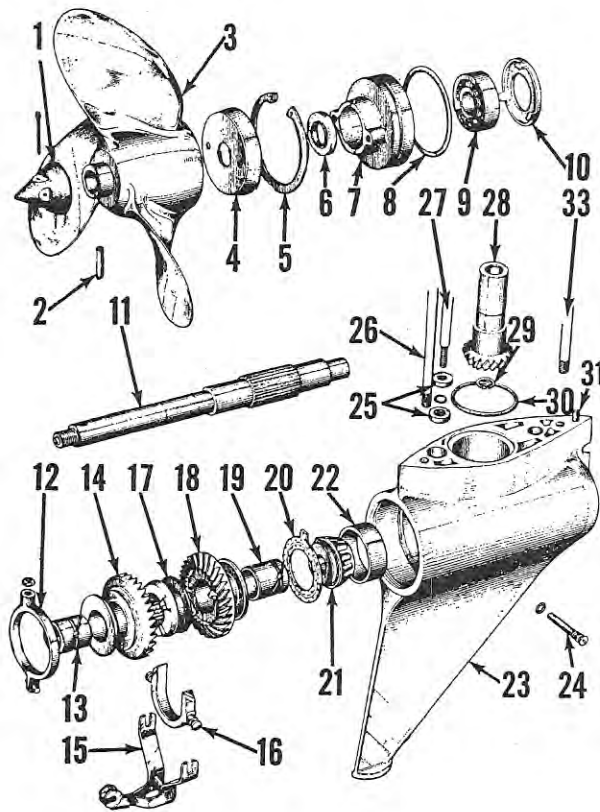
Exploded view of lower unit gear case and associated parts. An early model is pictured. Except for minor details, late models are similar in appearance.
